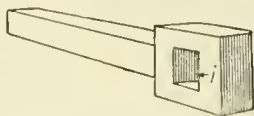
Former, to be held in tool post of lathe when drill is running and work is on back center
